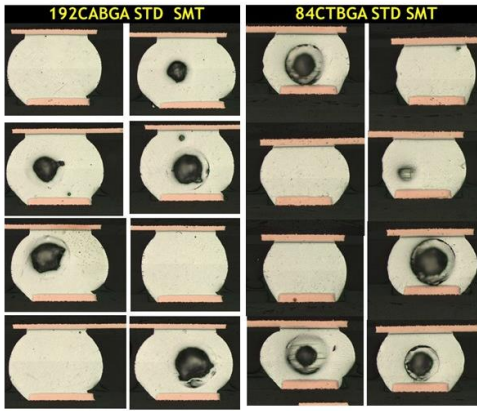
Optical photomicrographs showing a variety of solder joint voids and void locations in the 192CABGA and 84CTBGA components. Note, the voids in some solder joints are located near a soldered interface where fatigue cracks propagate (shown schematically in Figure 2b), thereby increasing the risk of earlier failure in thermal cycling.
